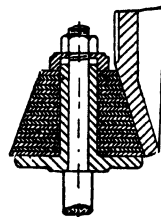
LEATHER OR MILLBOARD BEVEL PINION.
